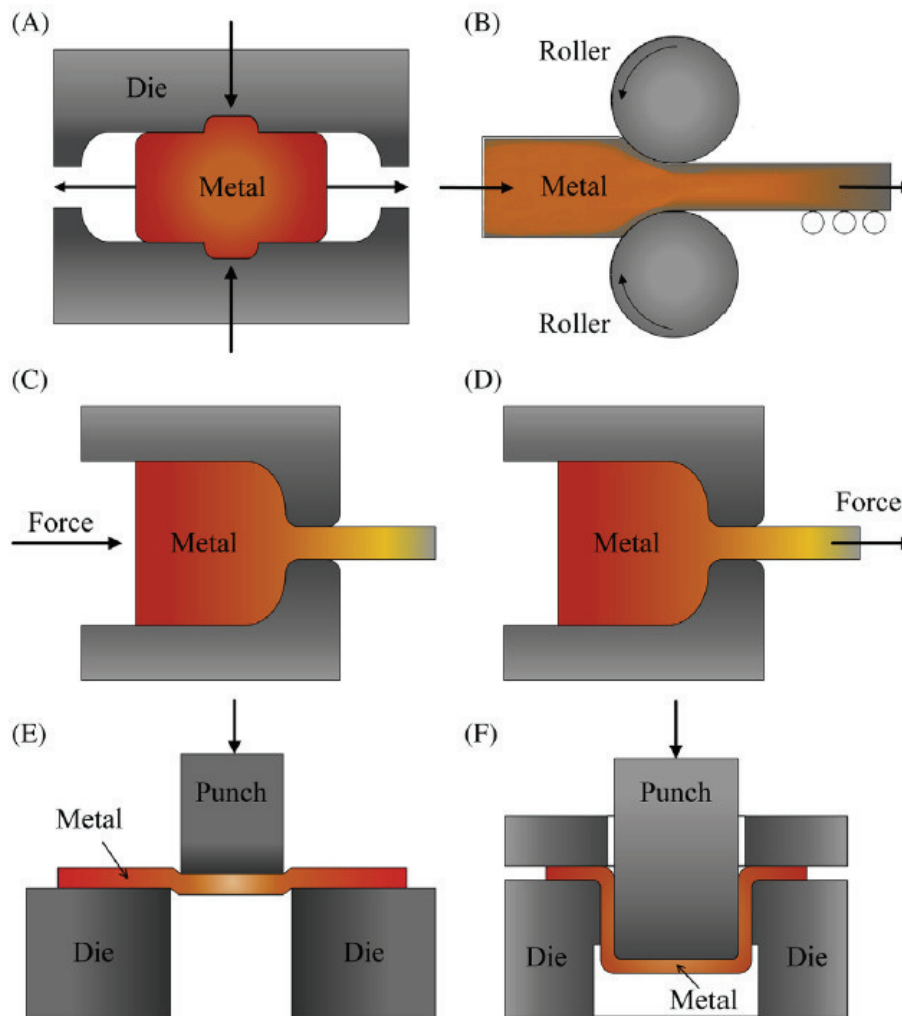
Essential bulk and sheet-metal forming processes: (A) forging; (B) rolling; (C) extruding; (D) drawing; (E) shearing; (F) stamping. [1].
